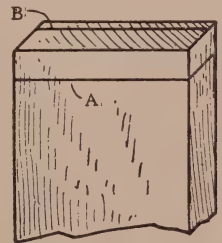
Scribing Shoulder and Edge Lines on Front
